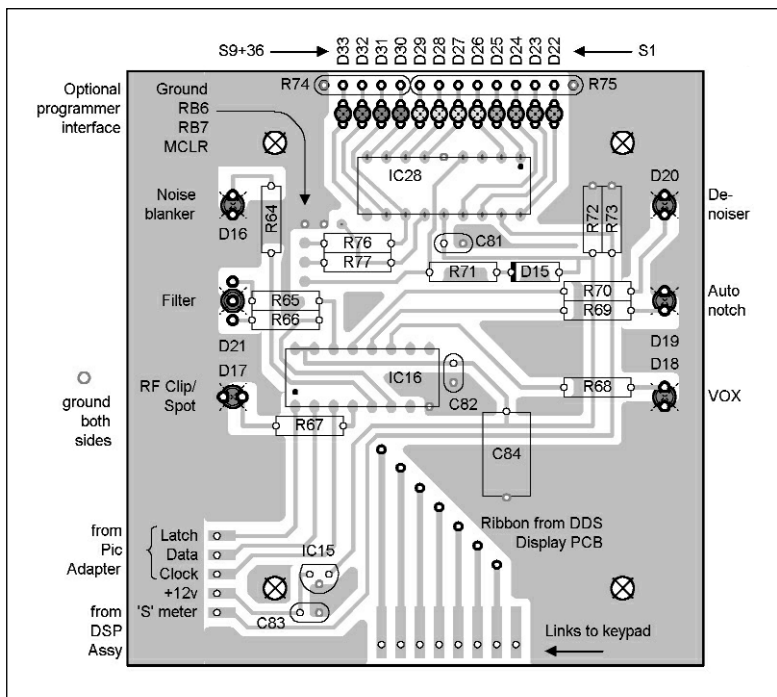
Component layout for the double-sided Status board PCB with the ground-plane side unetched (see Fig 8.39 in Appendix B for the PCB artwork). The picture is of the track side, viewed from the rear of the front panel. The width of this board (3in) accommodates that of the RF front-end which sits behind the Status board. All components except the LEDs are surface-mounted on the track side. This allows access to both the components and to the LED pads. The latter is needed to adjust the LED lead lengths for flush-fit to the front panel. The four mounting holes are for the keypad which is mounted using short spacers. The 7-way ribbon cable from the Pic 'N' Mix Display board is routed between this board and the keypad and made off to pads / tracks provided on this board and thence via short wire links to the keypad itself. IC16 and IC28 are mounted in sockets with all pins - except their respective ground pin - cut back for surface mounting. No connectors are specified. The relevant pads have a 0.1in pitch
